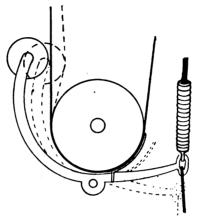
OUTLINE VIEW OF BELT TIGHTENER AND BRAKE.
